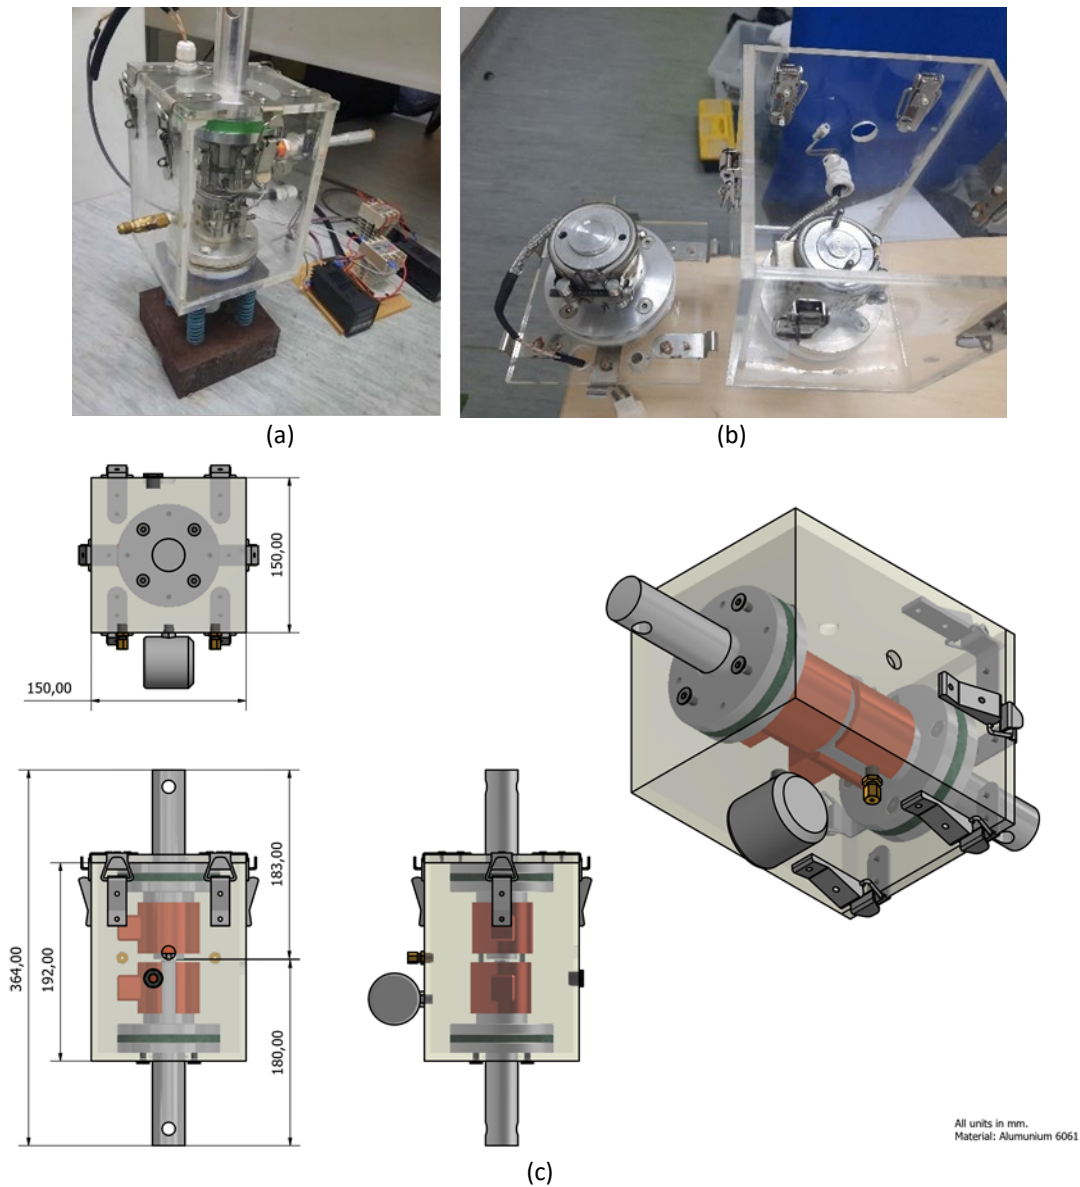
Photograph of HE moulds (a) Mould assembly (b) Mould Insert and (c) Mould assembly drawing
